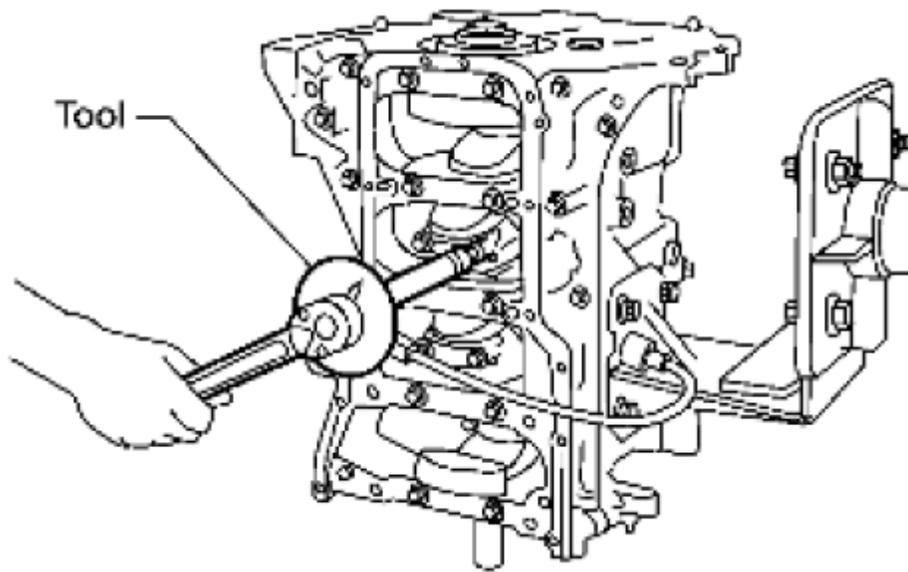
Tightening Connecting Rod Bolts Using Tool
